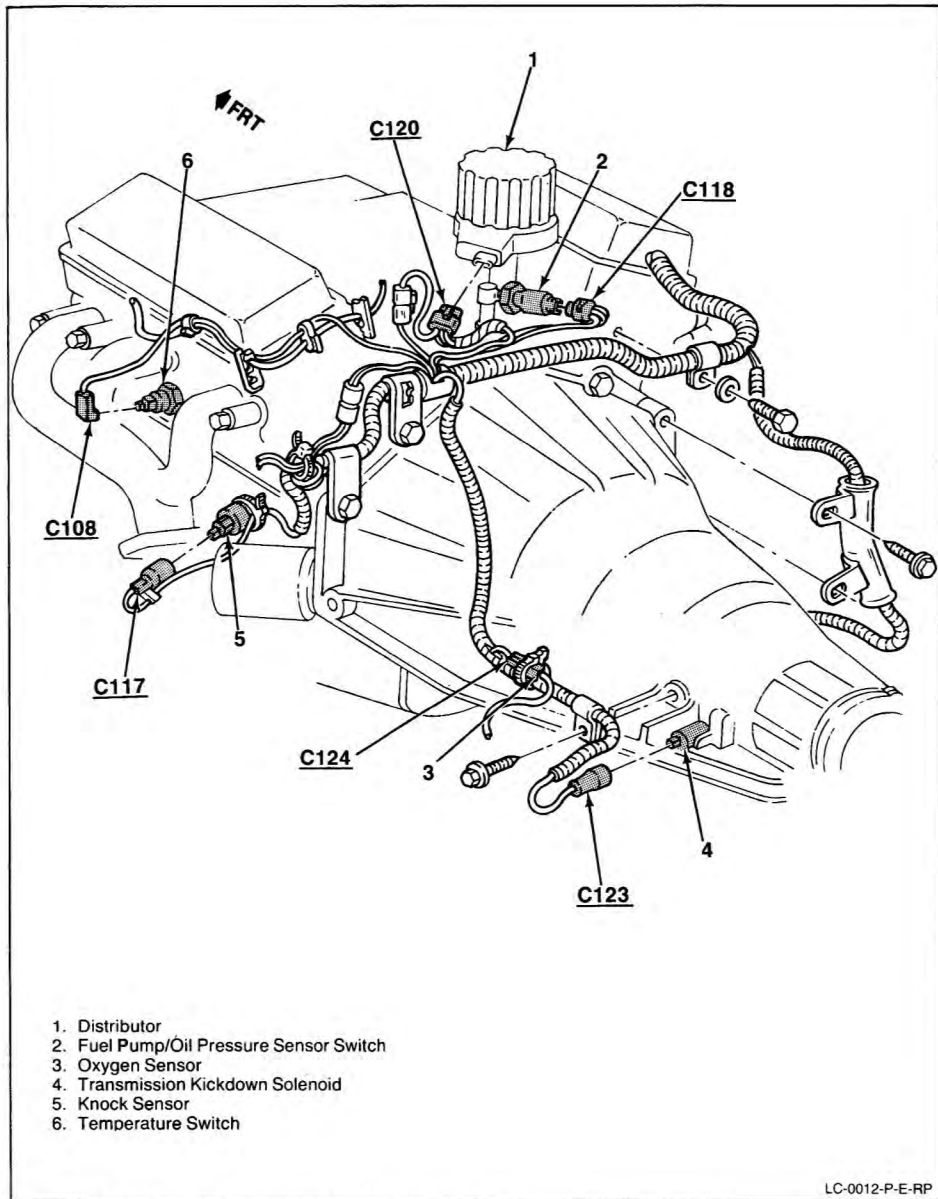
Engine Wiring Harness, LH Side (RPO LB4 w/P42)
